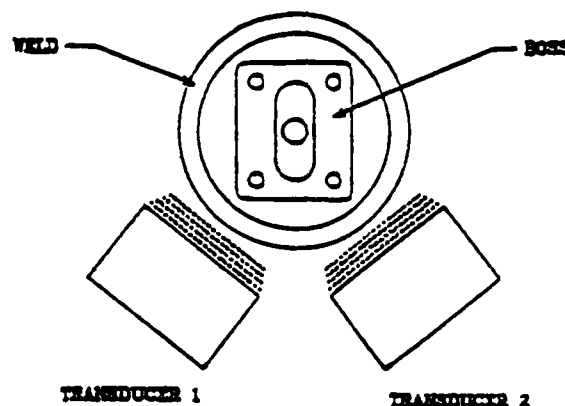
PWA OUTER COMBUSTOR CASE INSPECTION DESIGN
